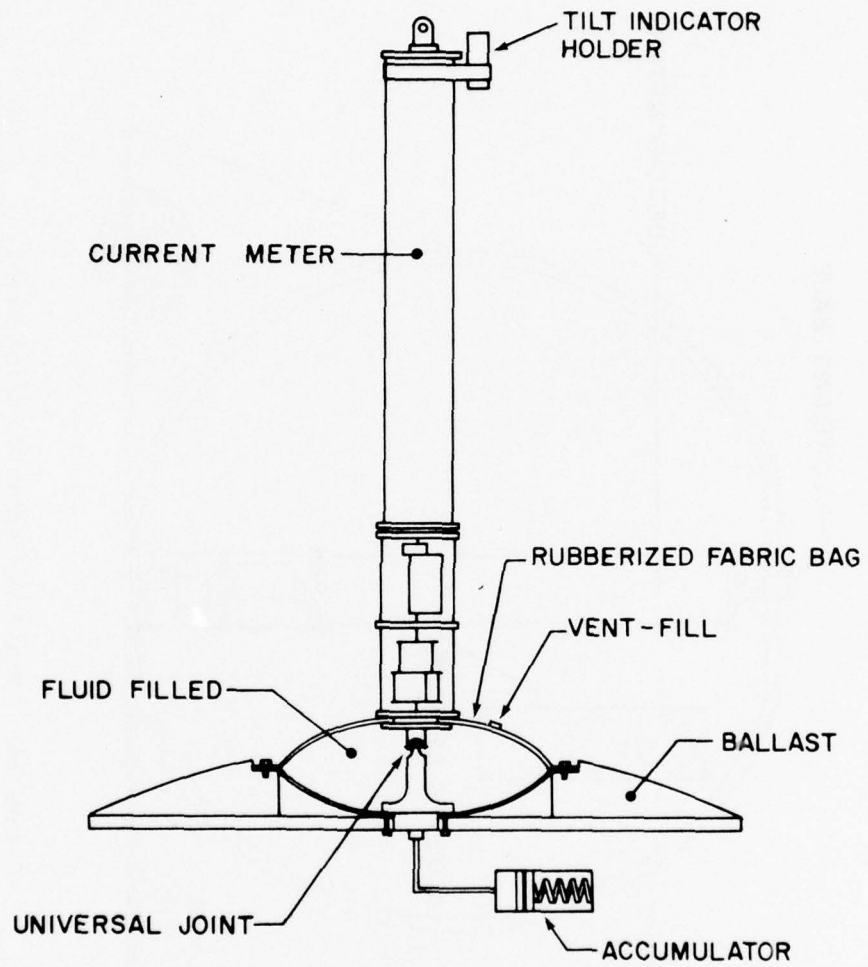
Fluid Filled Semi-Rigid Cushioned Mounting Pad
